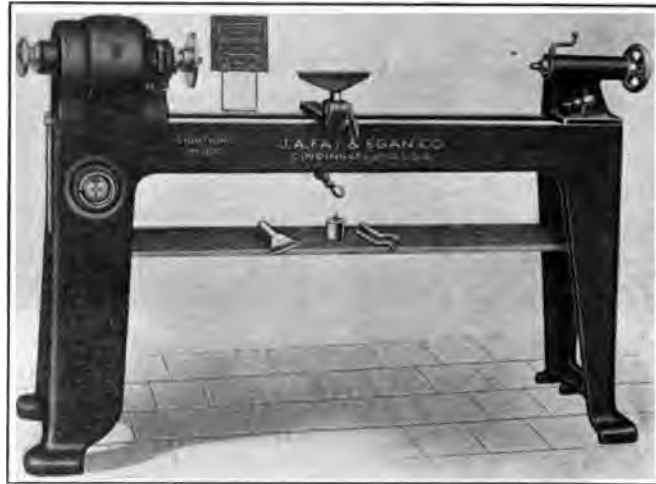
WOODWORKING LATHE WITH STARTER IN HEADSTOCK
